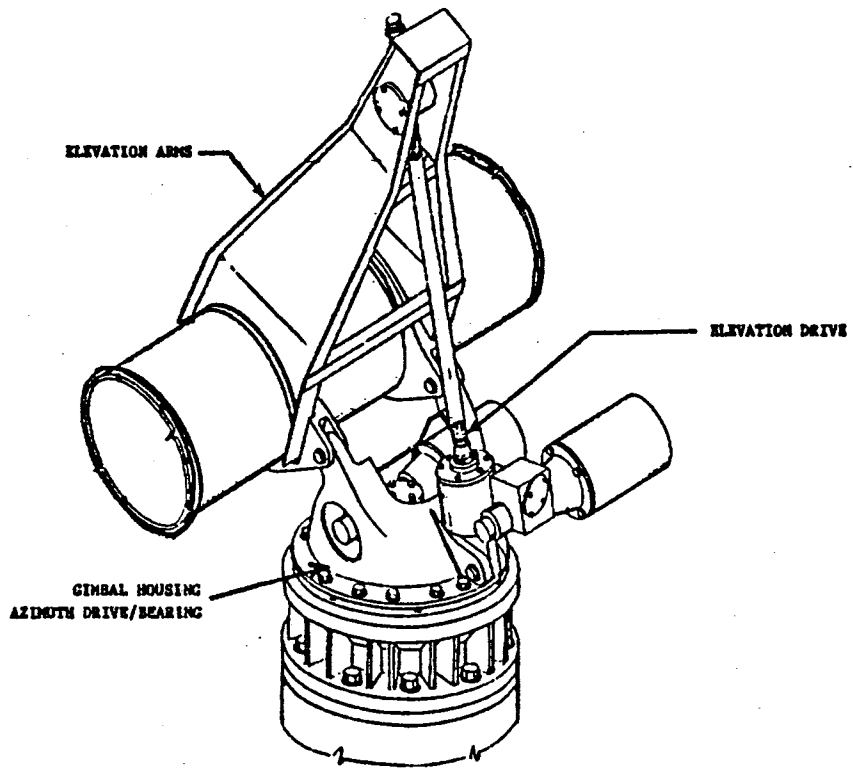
Gimbal/Actuator Drive Assembly
